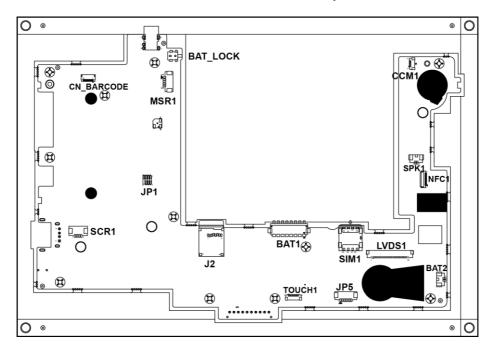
MB-5100 Main Board Component Locations (Bottom View)
